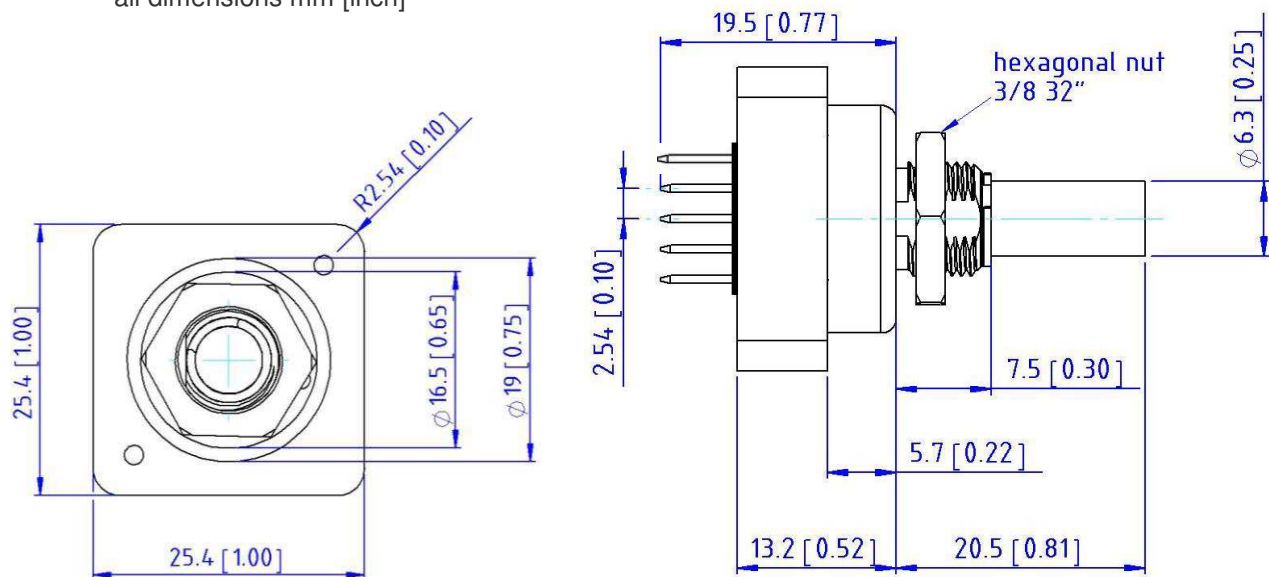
Dimensions of the ED-17-BB-512-S-P (top and side view)
